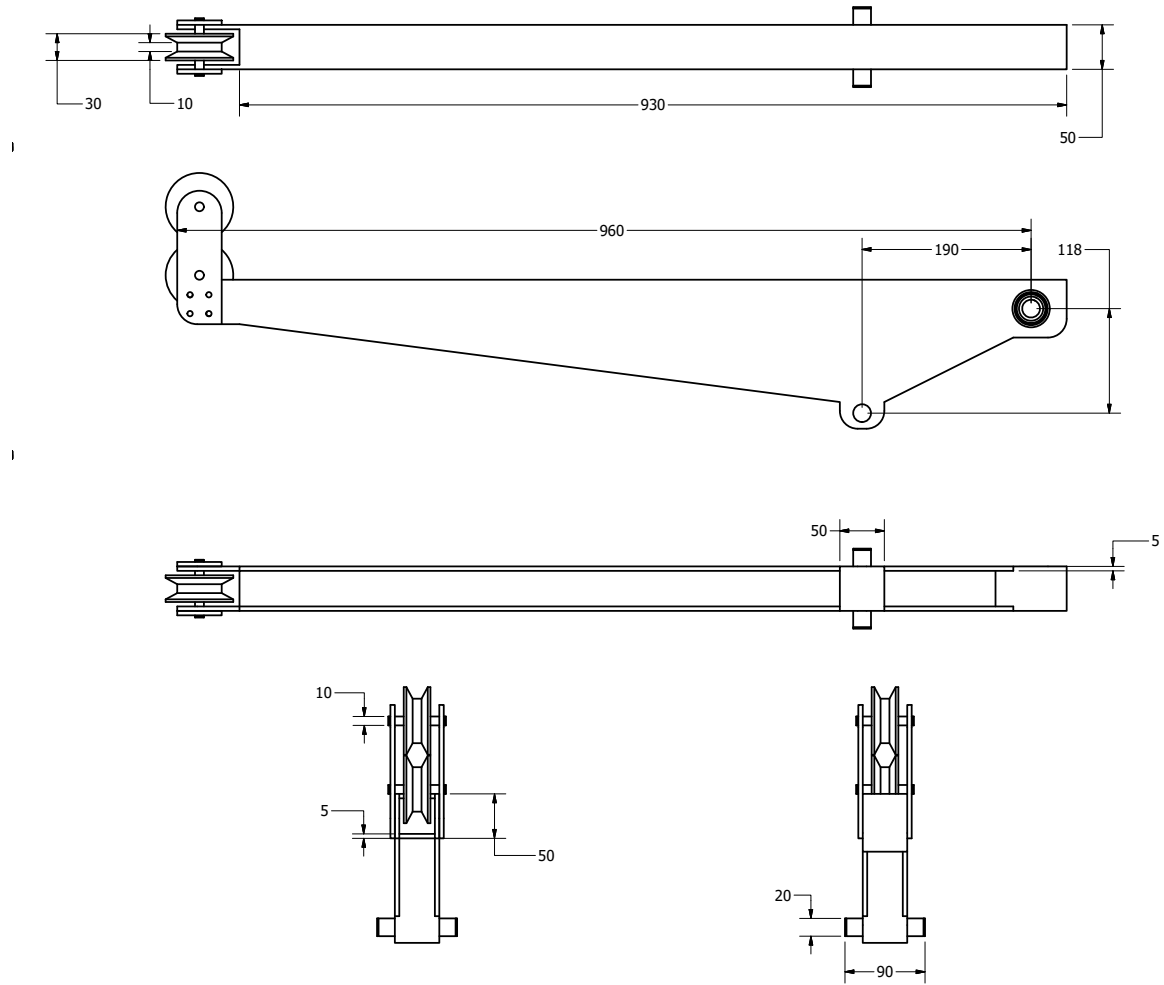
Upper Arm Final Design, all dimensions in are in mm.
